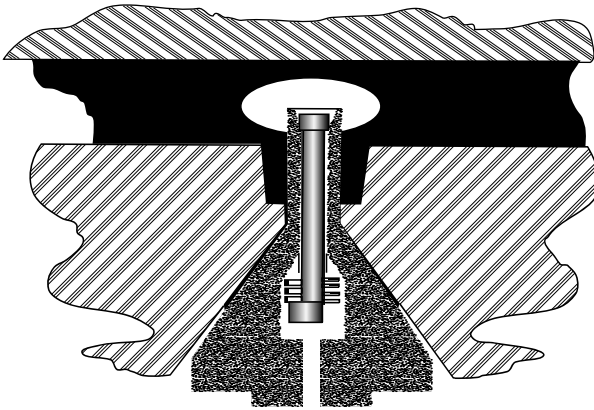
Gas injection pin mounted in the mold cavity.
